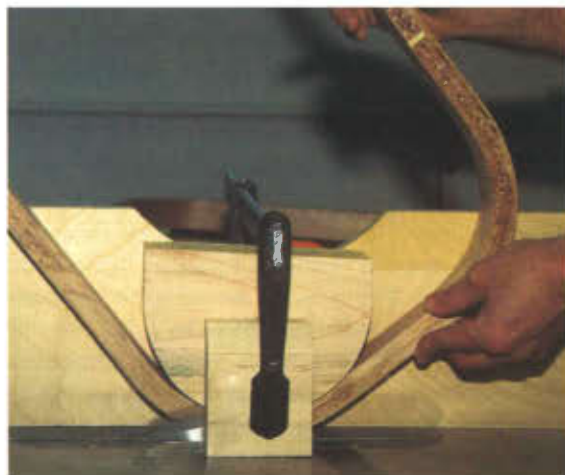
After jointing one edge, the finished width was cut on the table saw using an auxiliary fence which included a corner turning block. The higher fence, turning block and outside cover block helped stabilize the part preventing kickbacks. The blade actually extended up into the turning block for the final trim after a scoring cut was made first to prevent tear out on the exit side of the cut.
